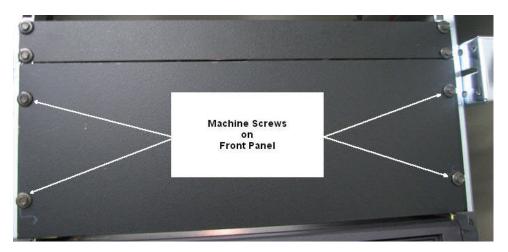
Secure Blank Panel Front Cover with Machine Screws
